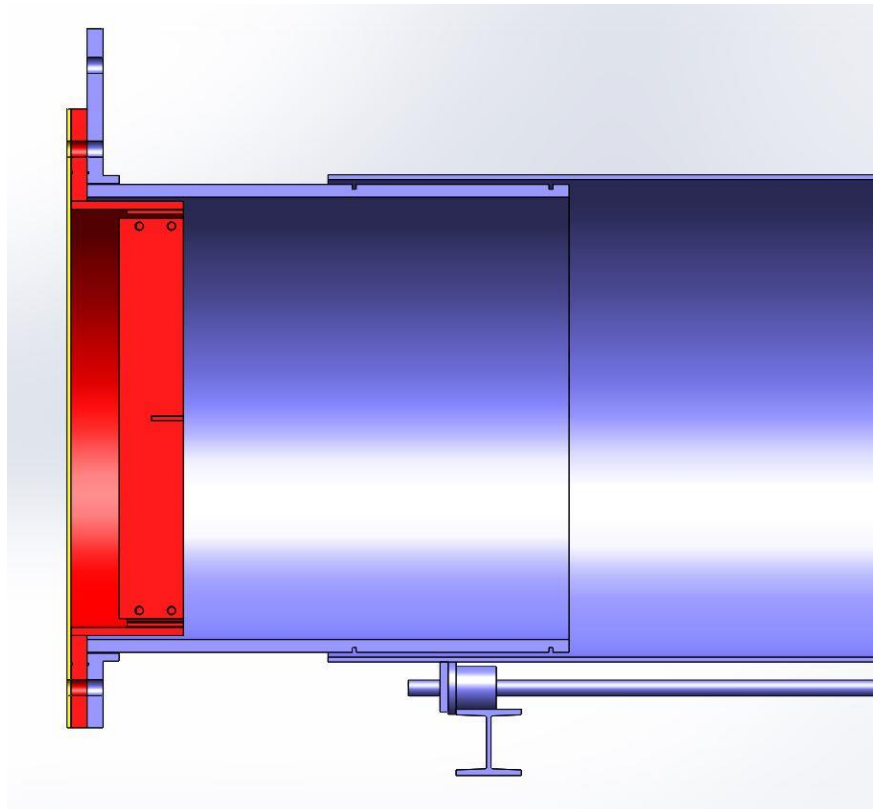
Profile section view of blade assembly installed in inspection assembly.
